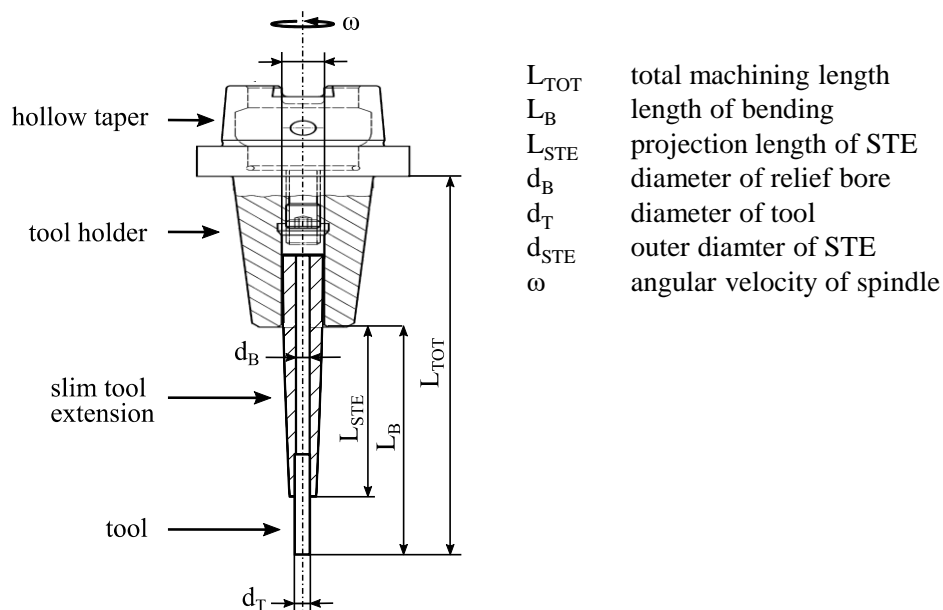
Schematic of a STE clamped into a tool holder with tool attached [46]
